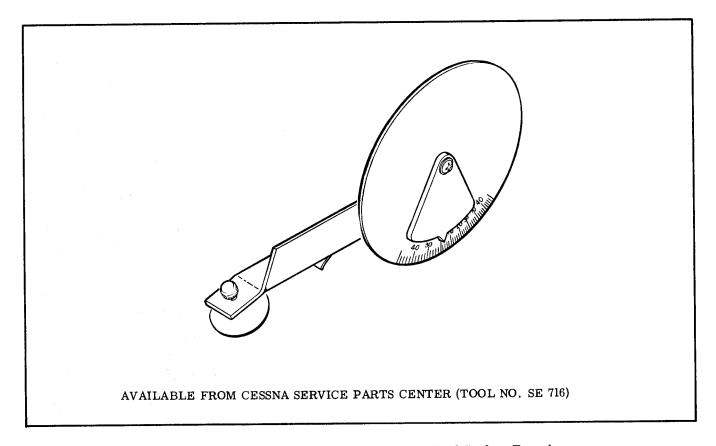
Inclinometer for Measuring Control Surface Travel
